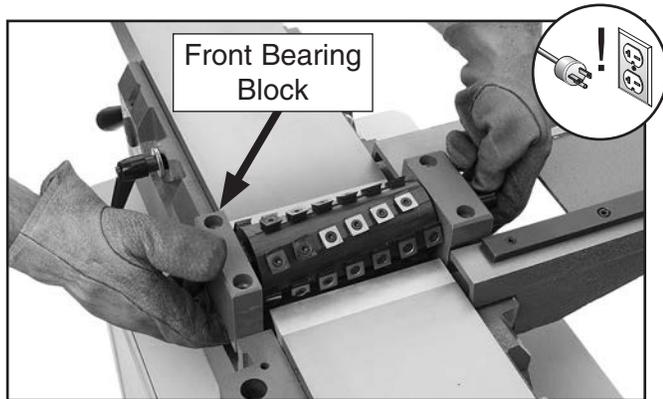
Example picture of a spiral cutterhead being installed (T27449 not shown).
